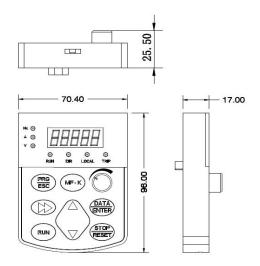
Appearance and installation dimension of keypad [old product] (with potentiometer)
